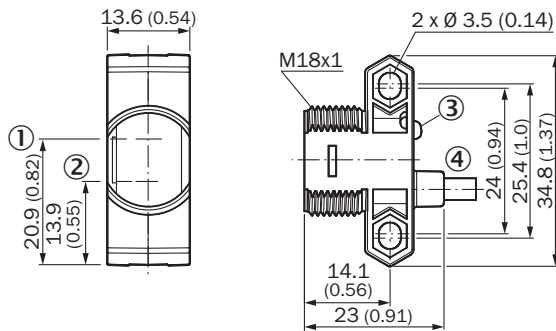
ZLx18-1xxxx / ZLx18-Axxxx, cable
